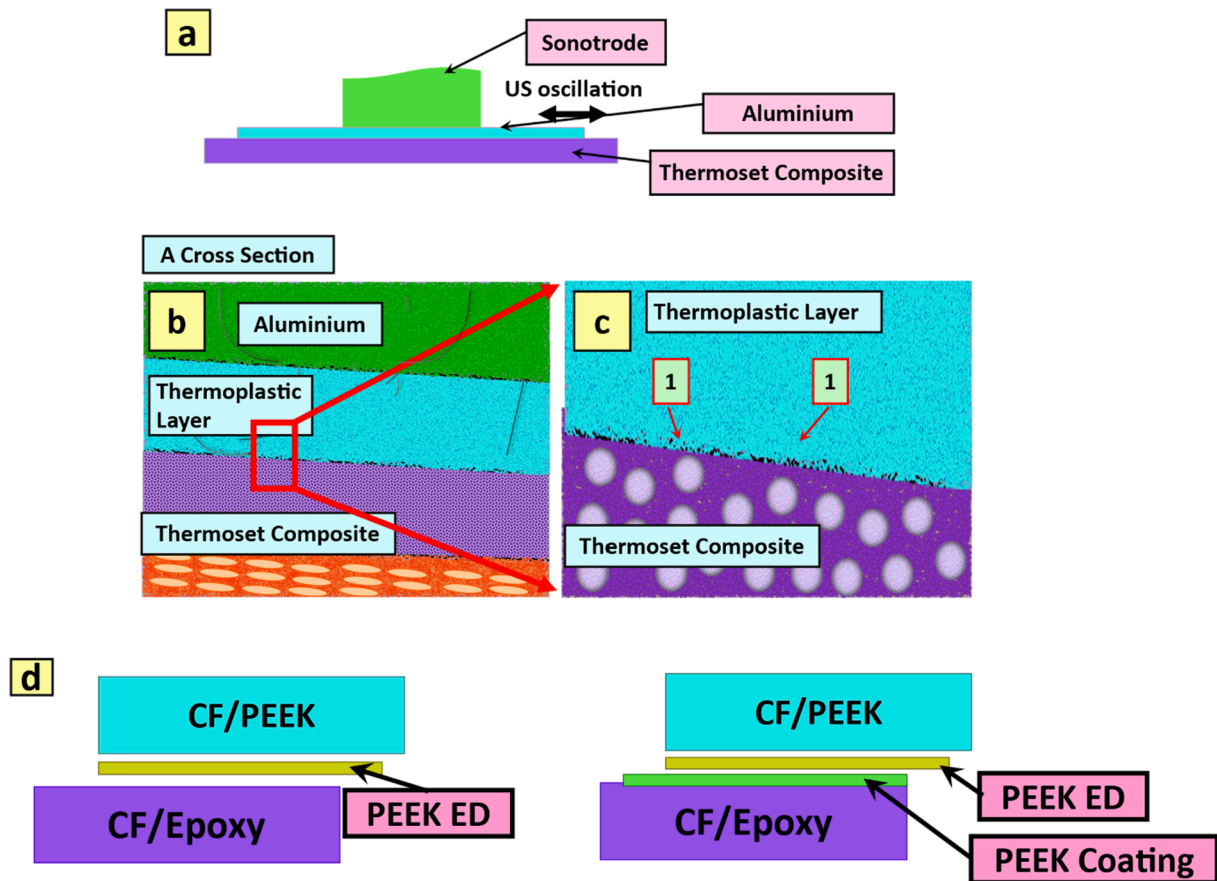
a) Schematic of ultrasonic welding. b) welding of aluminium to thermoset using an interlayer. c) The established direct contact between the surface of the plastically deformed aluminium and composite fibre (adapted from [19]). d) Schematic view of welding between a thermoplastic and a thermoset using an interlayer co-cured to the surface of the thermoset (adapted from [131]).
